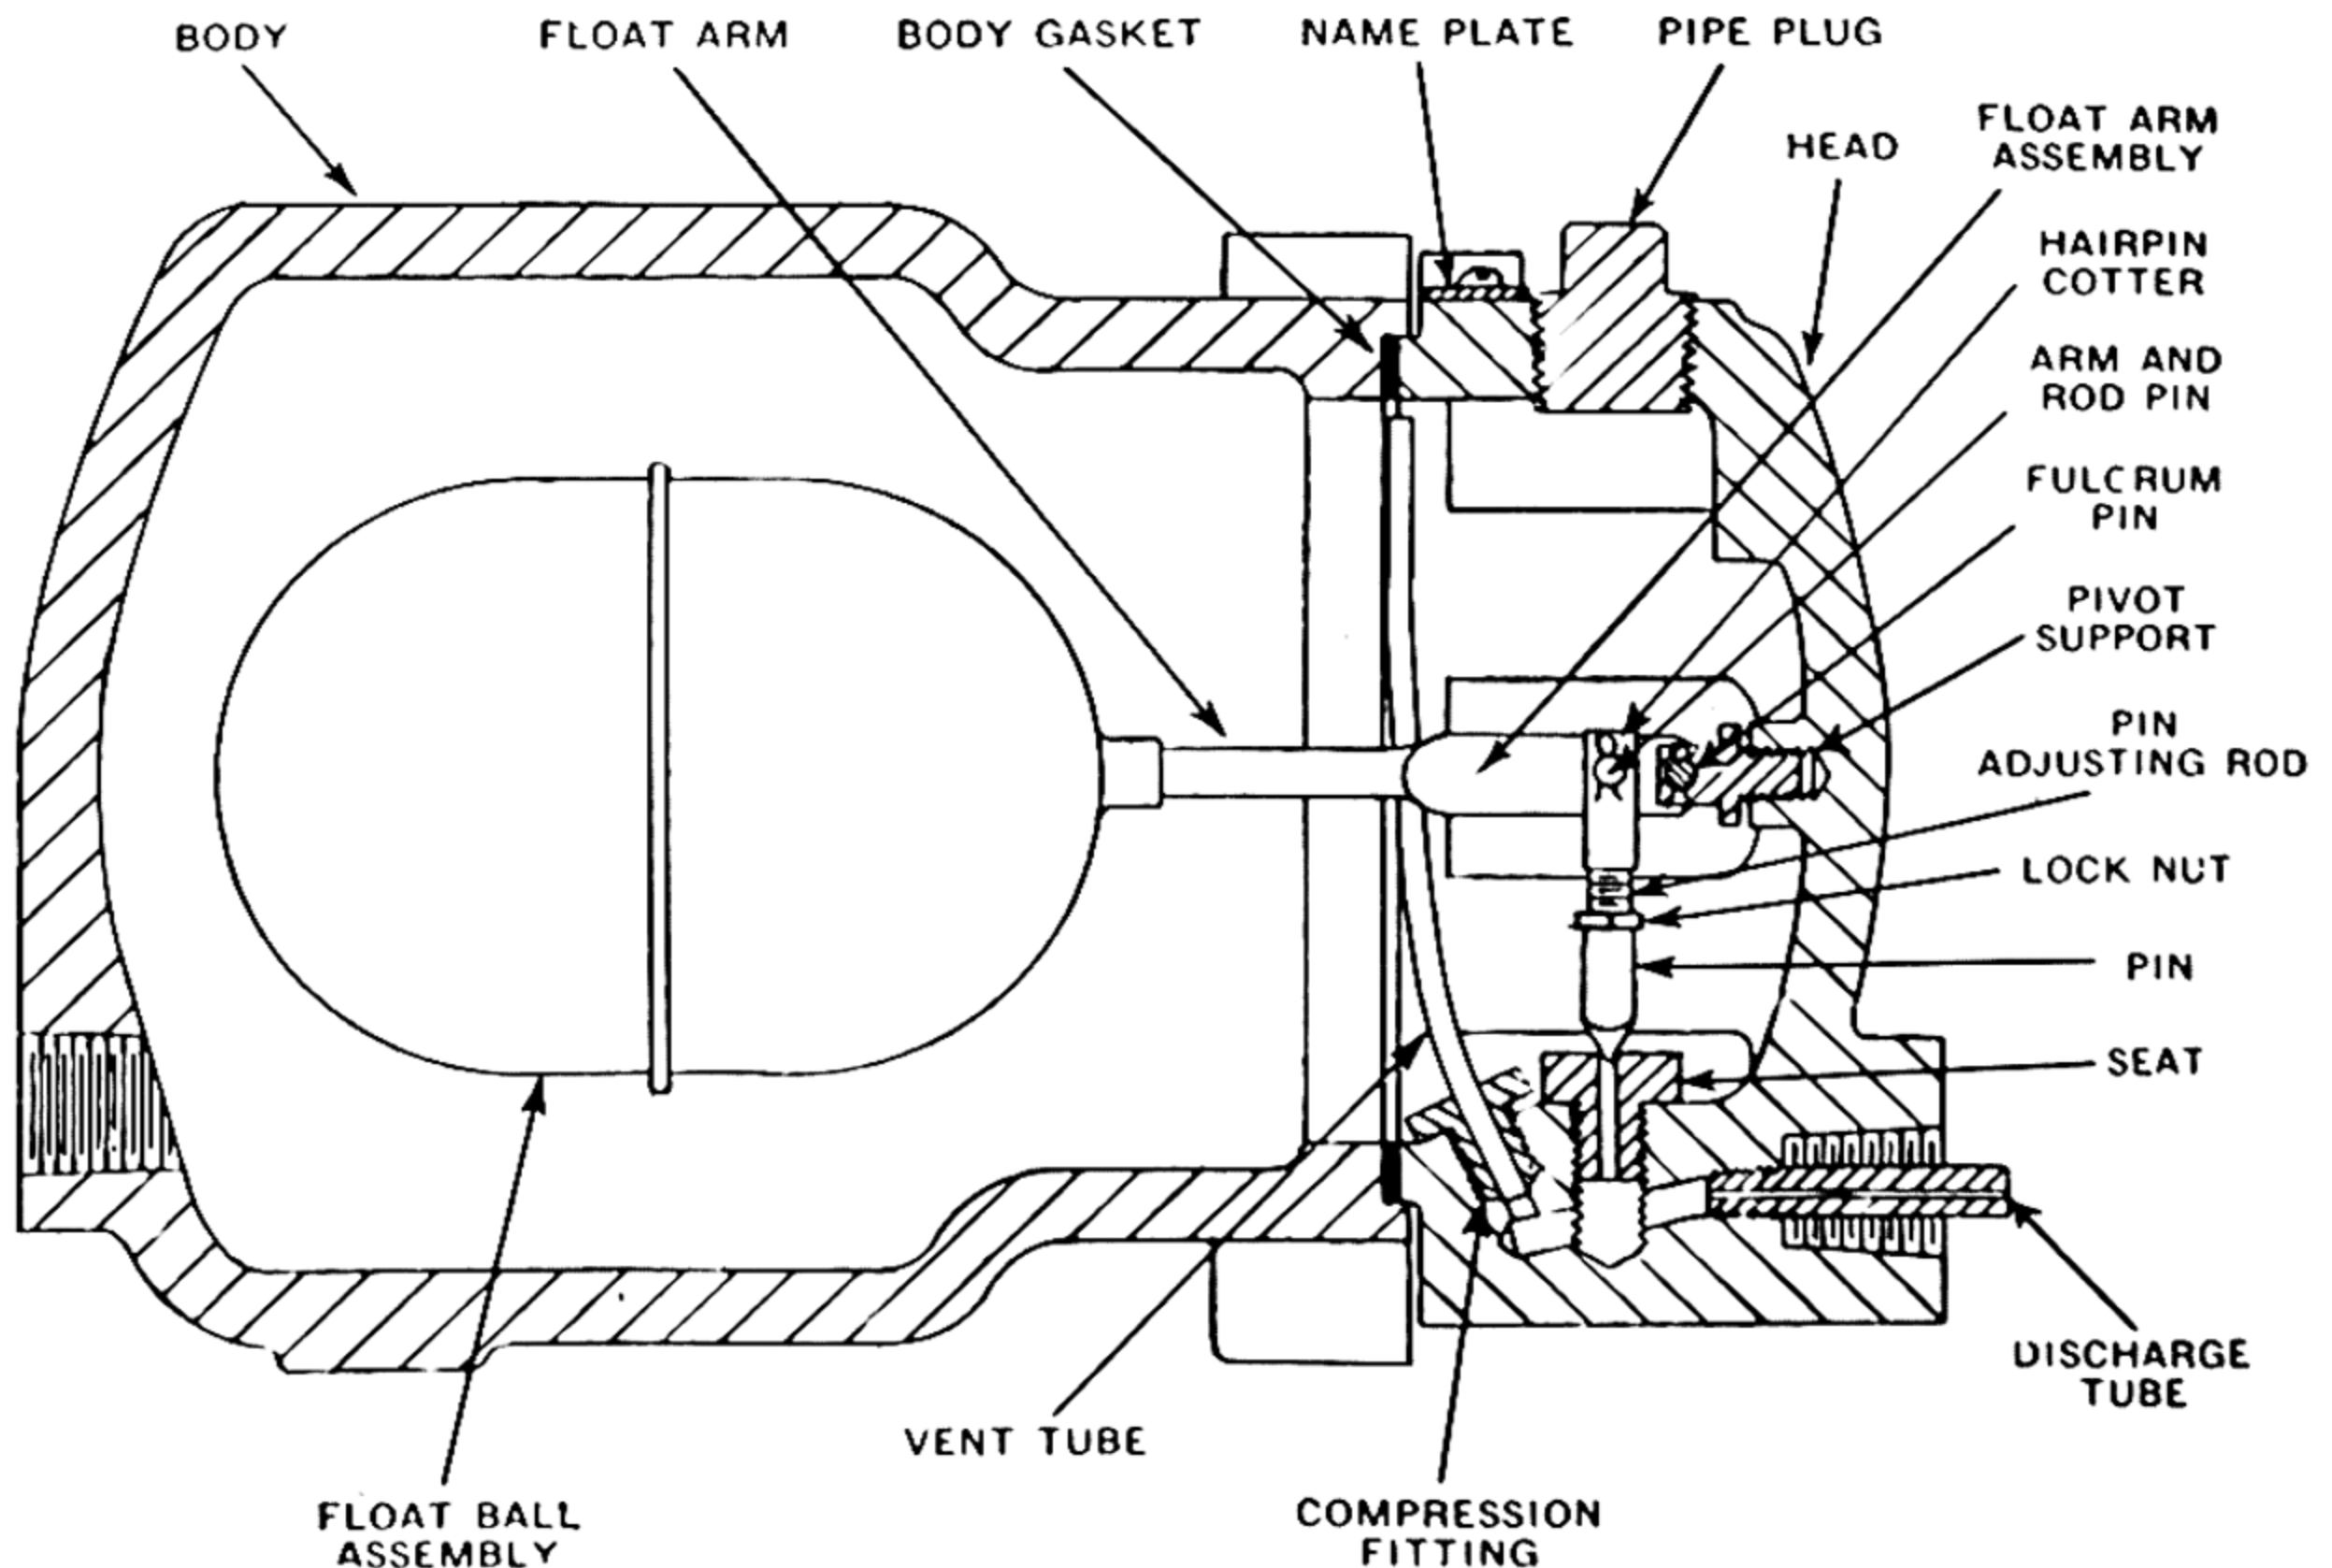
Detail of high-side float assembly. Courtesy Alco Valve Co.
